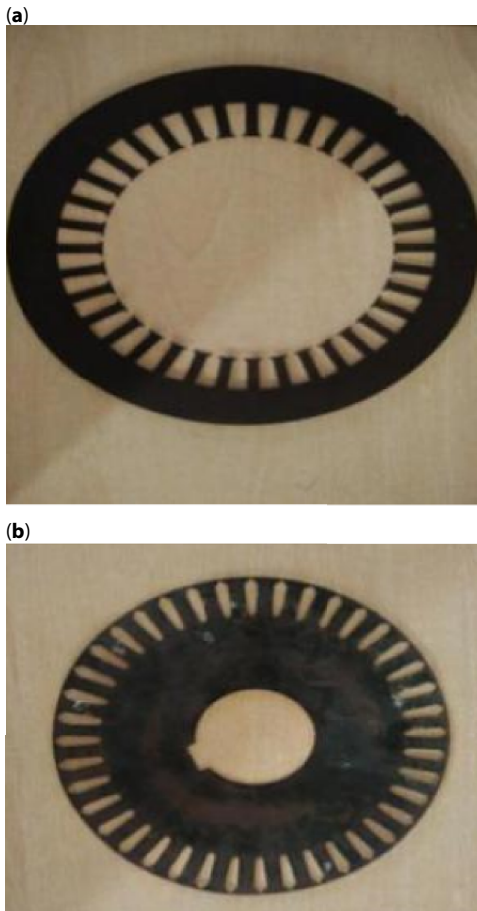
(a) Stator stamping; (b) rotor stamping.
